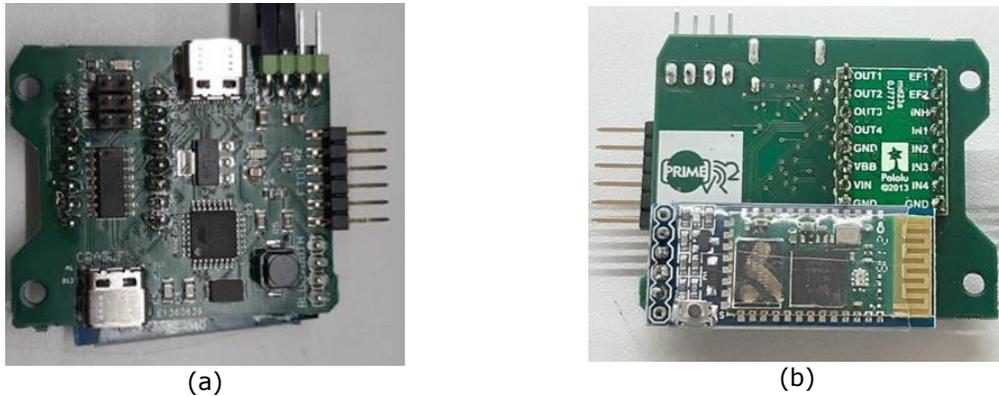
(a) Mainboard with (b) Bluetooth (soldered to the backside of the mainboard).
